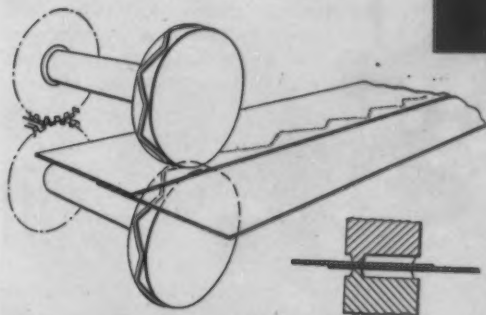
Mechanical zig-zag welding to join metal more securely. The schematic diagram demonstrates the mode of operation, and a cross-section of the embossed electrodes is shown at the lower right.
